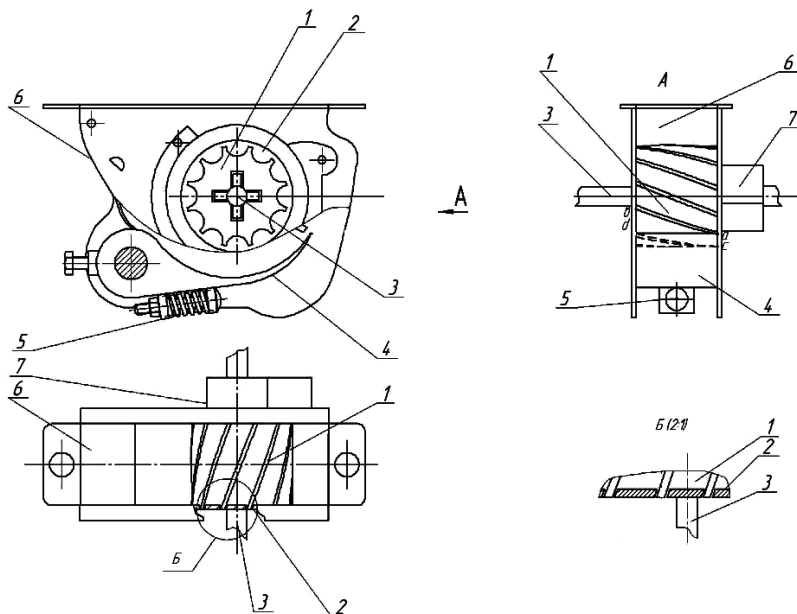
Scheme of the sowing machine: 1 - coil with helical grooves; 2 - socket; 3 - shaft of the sowing machine; 4 - valve; 5 - adjusting bolt; 6 - seed box; 7 - clutch
